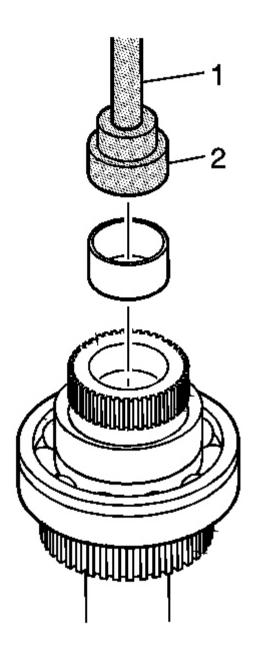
Installing Mainshaft Rear Support Bushing Using J 42176 & J 45757 Courtesy of GENERAL MOTORS CORP.
